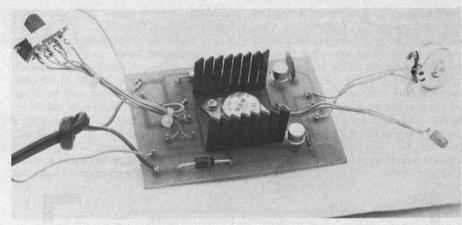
Completed P.C.B. note clips holding wires together you can use masking or cellotape for this.
